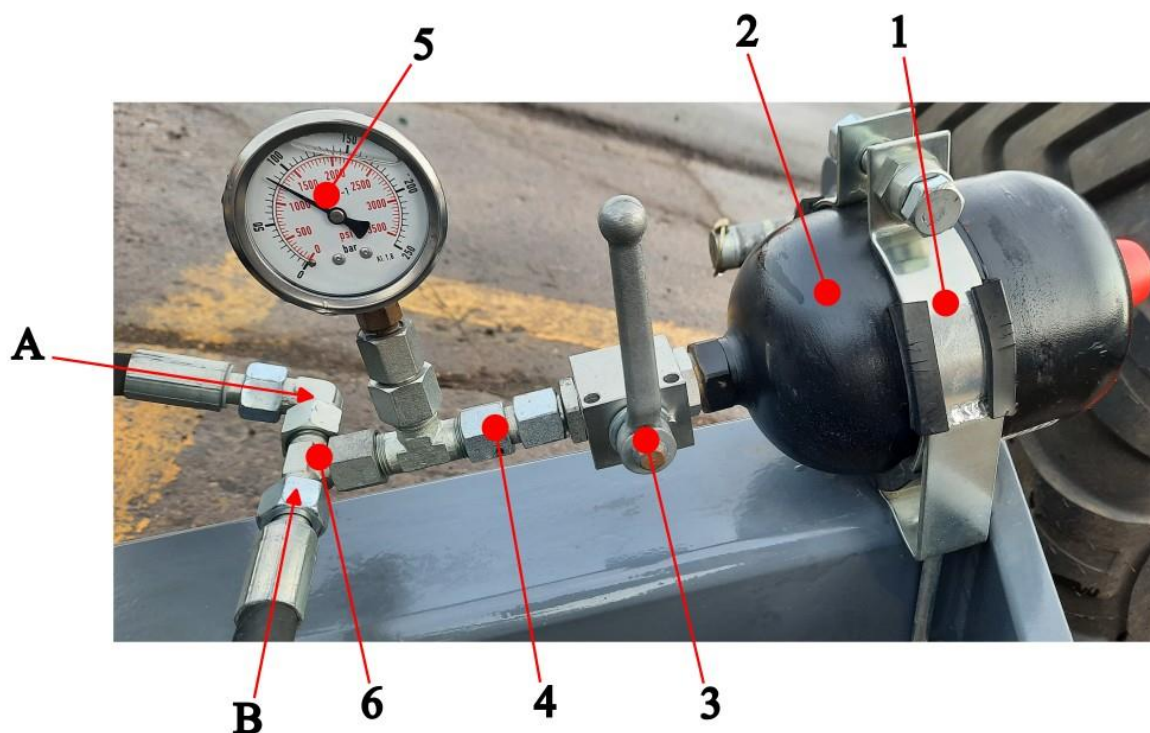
Diagram of the vibration compensation system (1- accumulator clamp, 2- hydro-pneumatic accumulator tank, 3- ball valve with copper / steel-rubber washer, 4- adapter, 5- pressure gauge, 6- tee)
